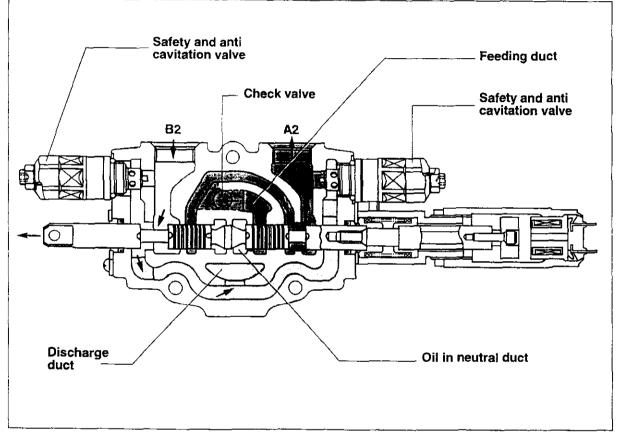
Bucket section in tilt phase (mechanical control)
